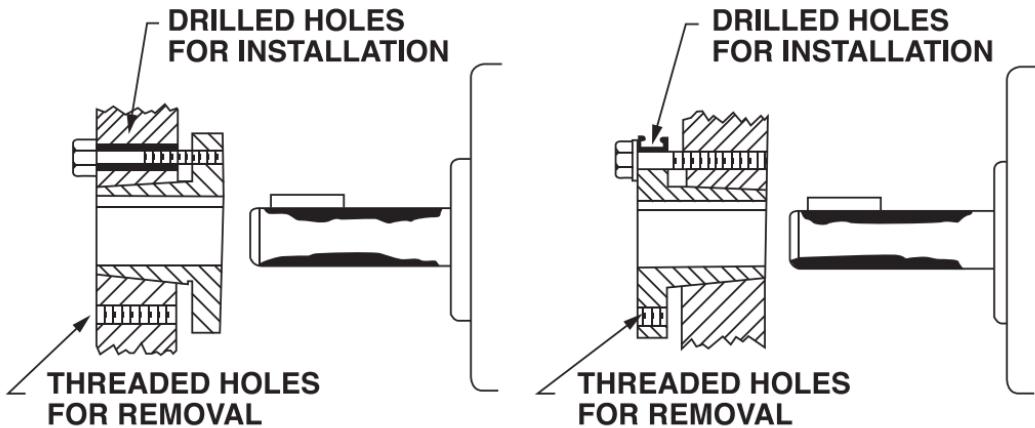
QD Bushing Conventional Mounting (Left) and Reverse Mounting (Right)
